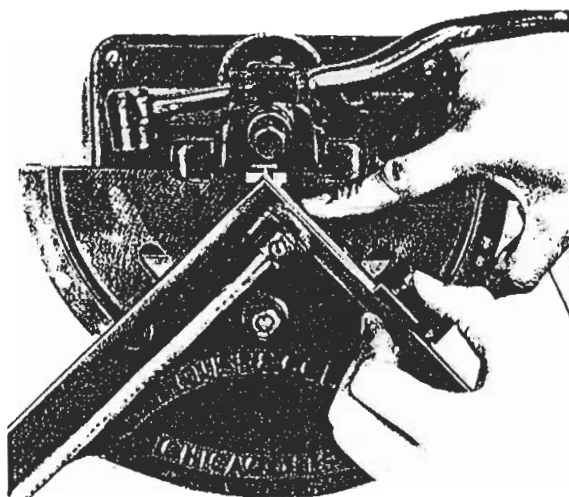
B. Set Sliding Gauge so that About Three Points Will Be Mitered Off Rule
